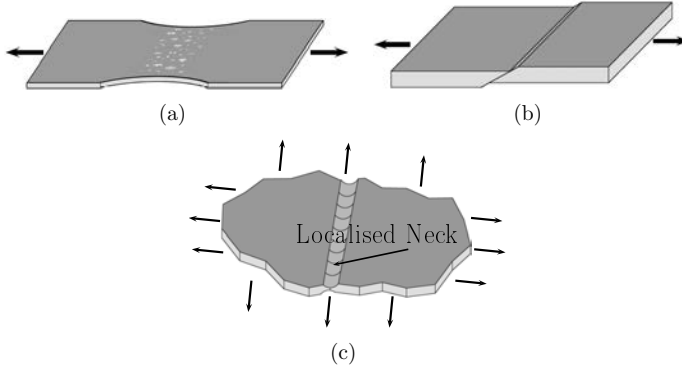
Failure types in sheet metals, (a) ductile fracture, (b) shear fracture, (c) instability with localisation.
